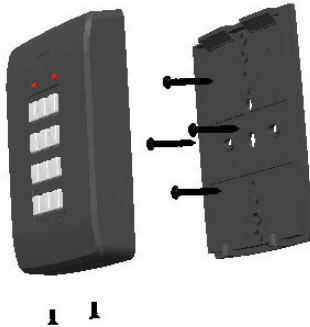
shows the front view of the AY-V64 Multi-Reader.
